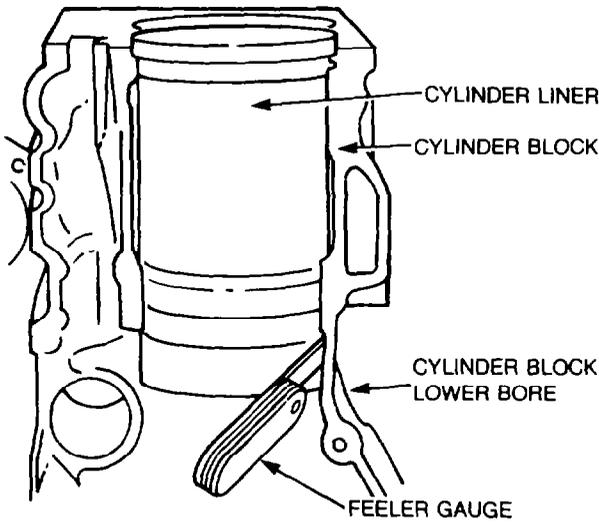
Measuring Cylinder Liner to Lower Cylinder Block Clearance
